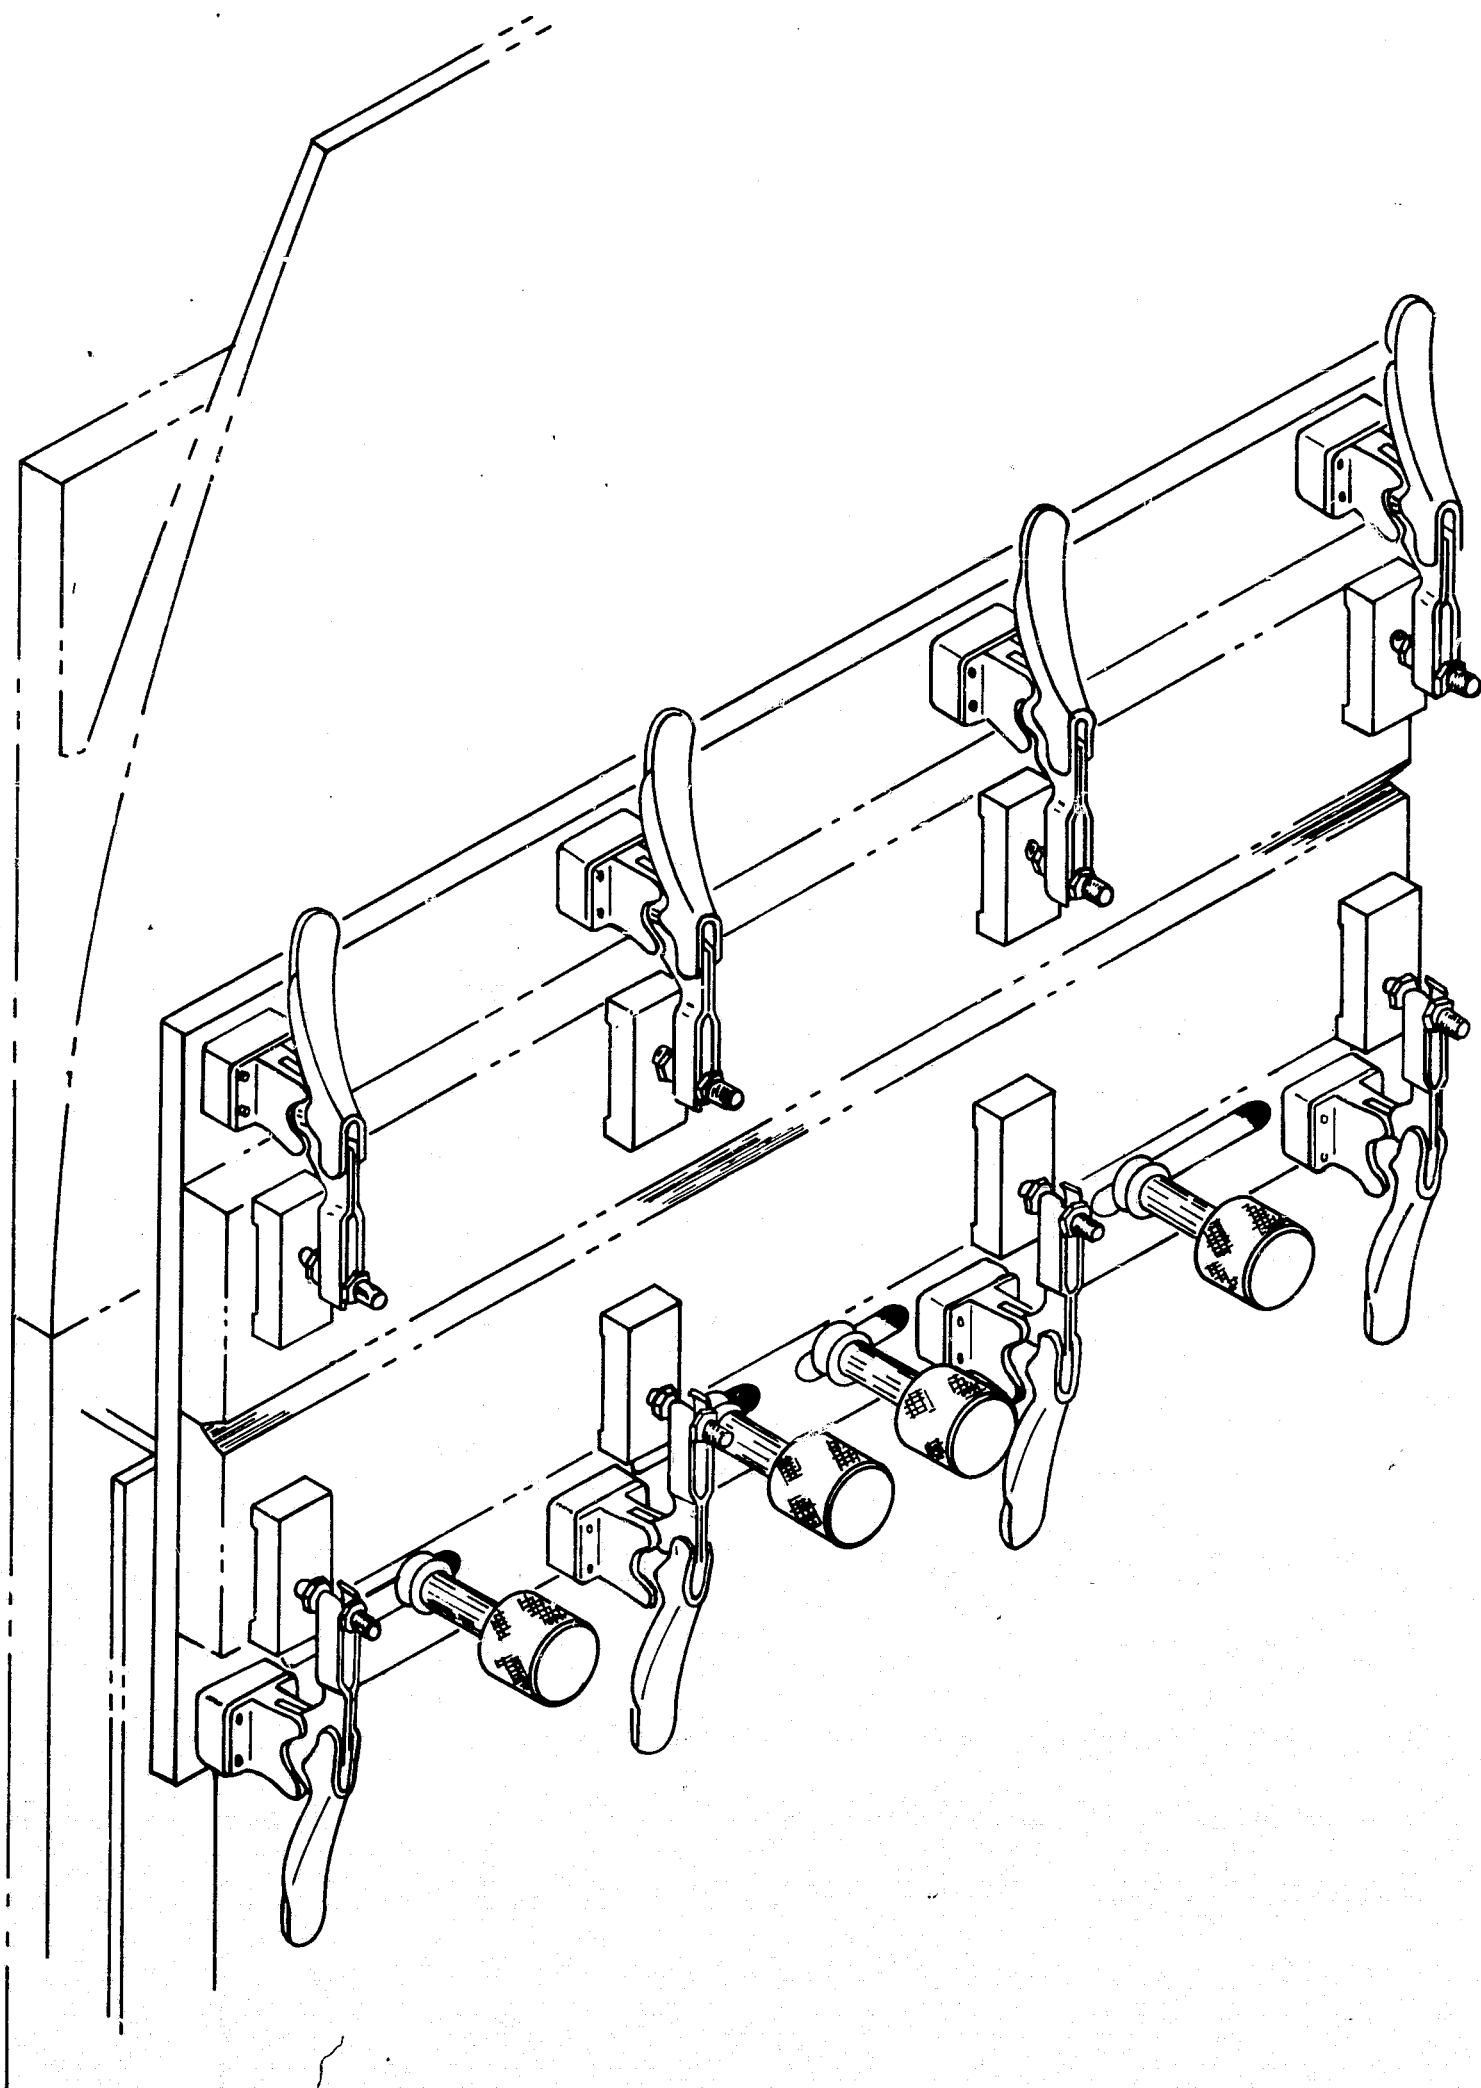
Y-RING-TO-SKIN, TEST WELD FIXTURE
